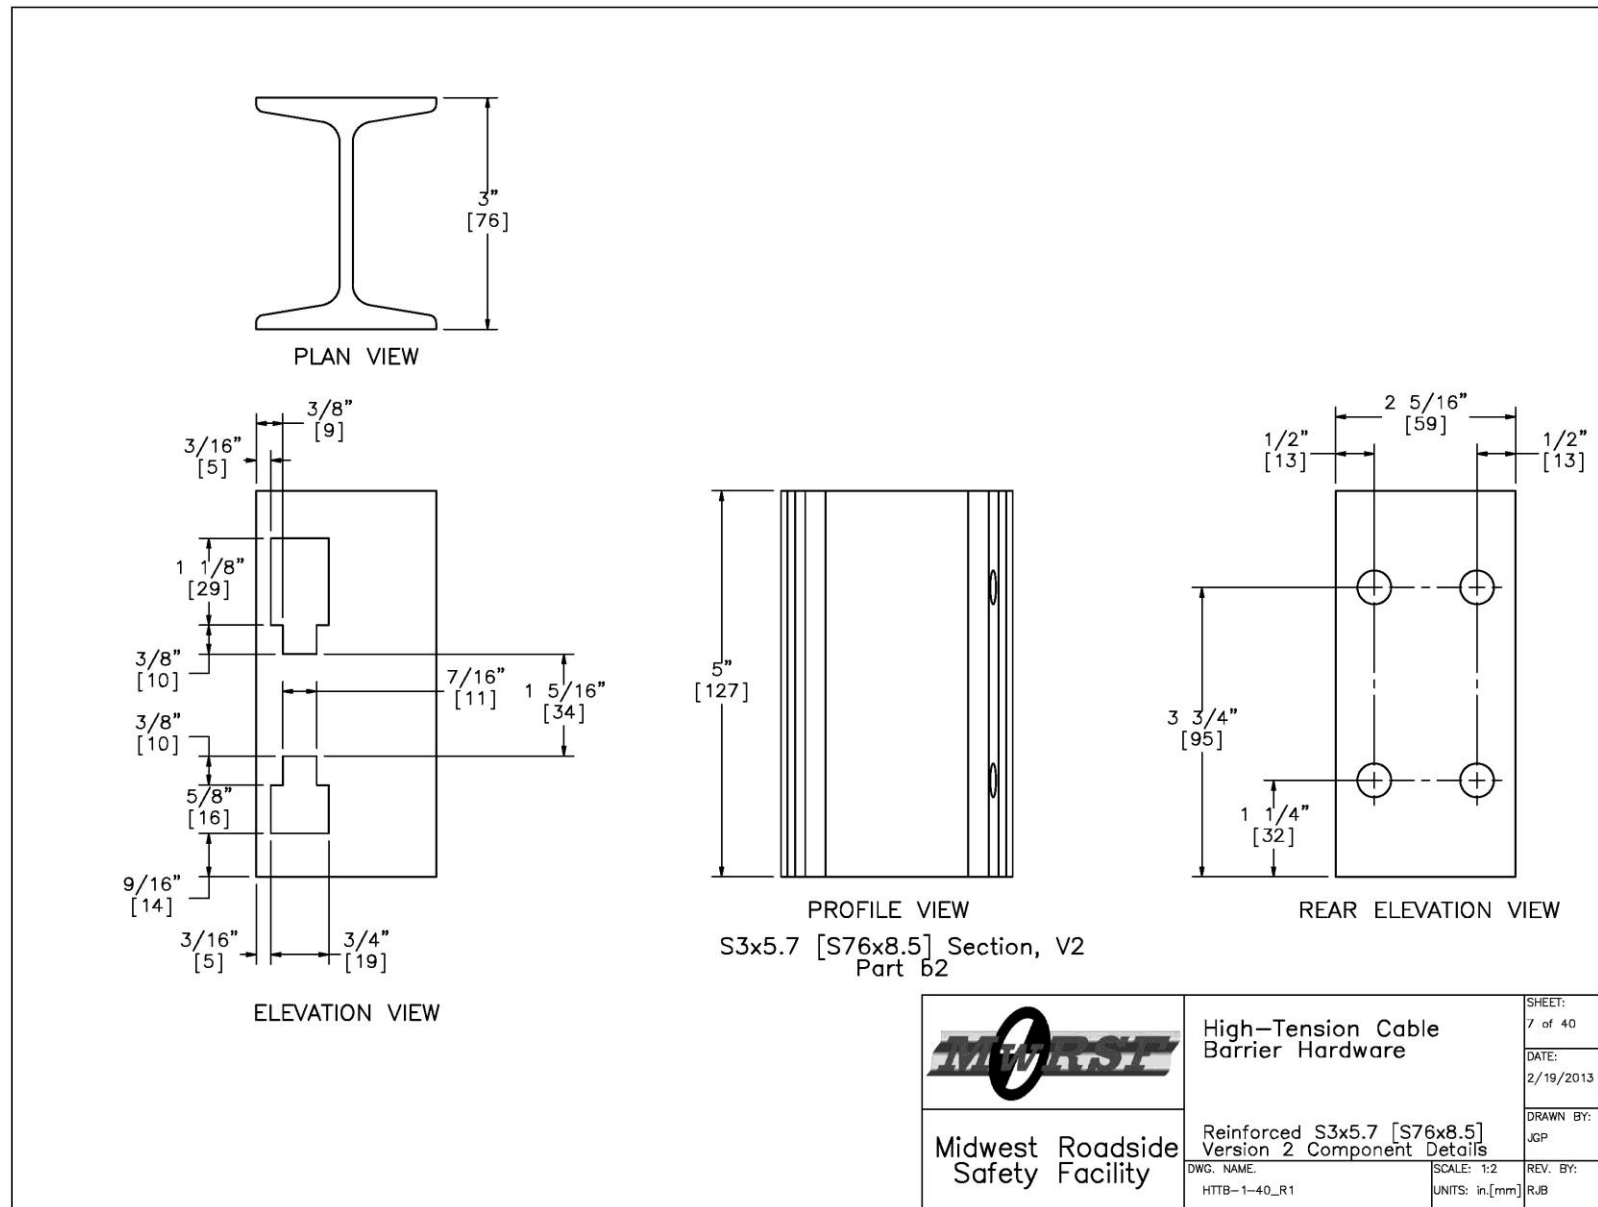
Reinforced S3x5.7 (S76x8.5) Section Version 2 Details, Test Nos. HTTB-1 through HTTB-40
